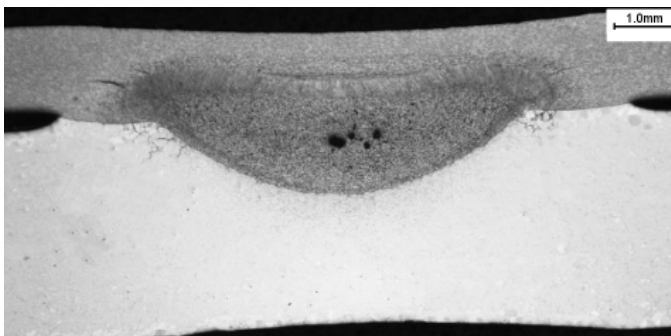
General view of the weld joint with visible cracks and porosity in the welding nugget, etched with Ma1Al
